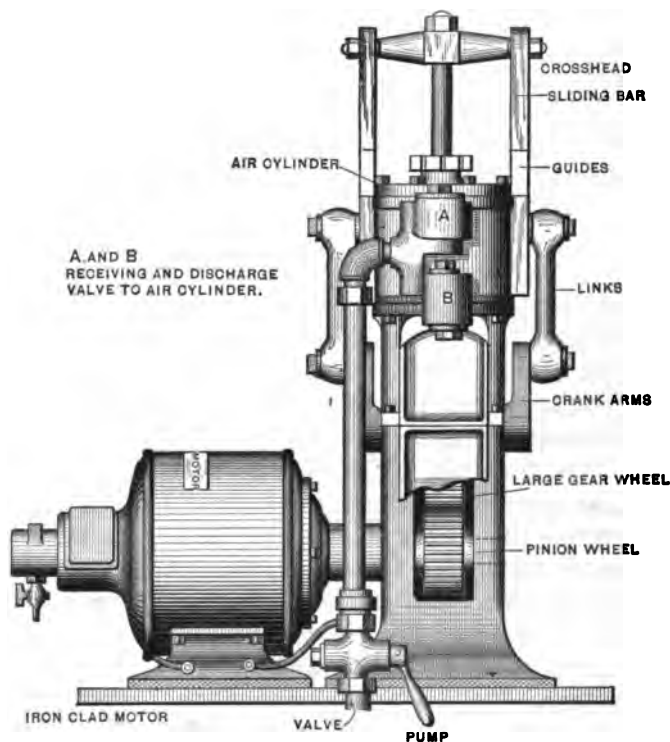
ELECTRIC-DRIVEN AIR-COMPRESSOR FOR ELECTRIC LOCOMOTIVE.
